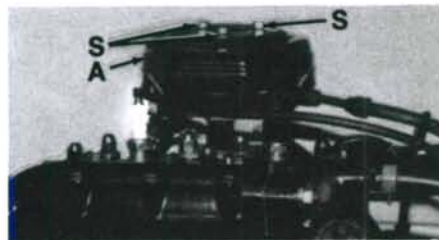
On JS550 models prior to 1986, remove three cap screws (S) to withdraw flame arrestor assembly (A).
